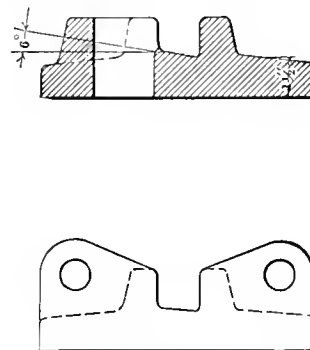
SECTIONAL VIEW AND FLANGE OF BASE PLATE.
